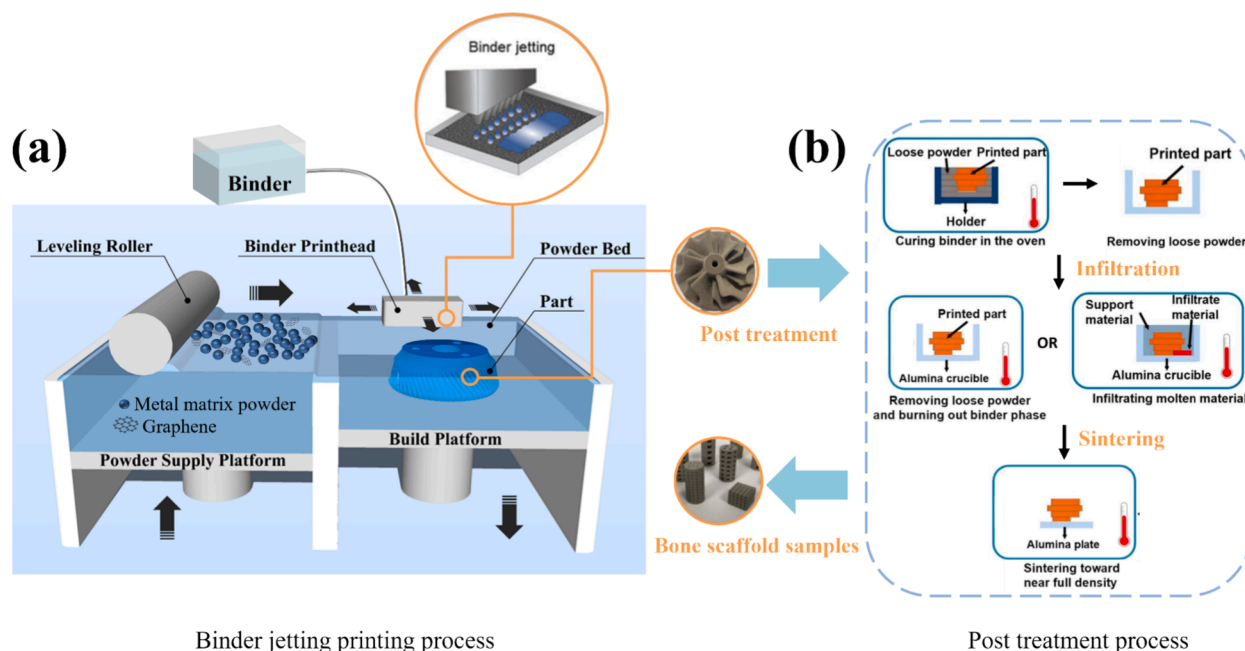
A schematic drawing illustrating the fabrication of GBMMCs via binder jetting [149–153].
